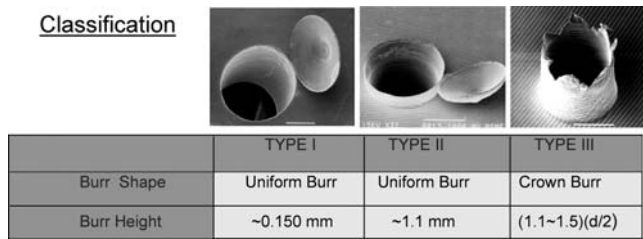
Three typical burrs in drilling stainless steel, Dornfeld and Lee [2]
